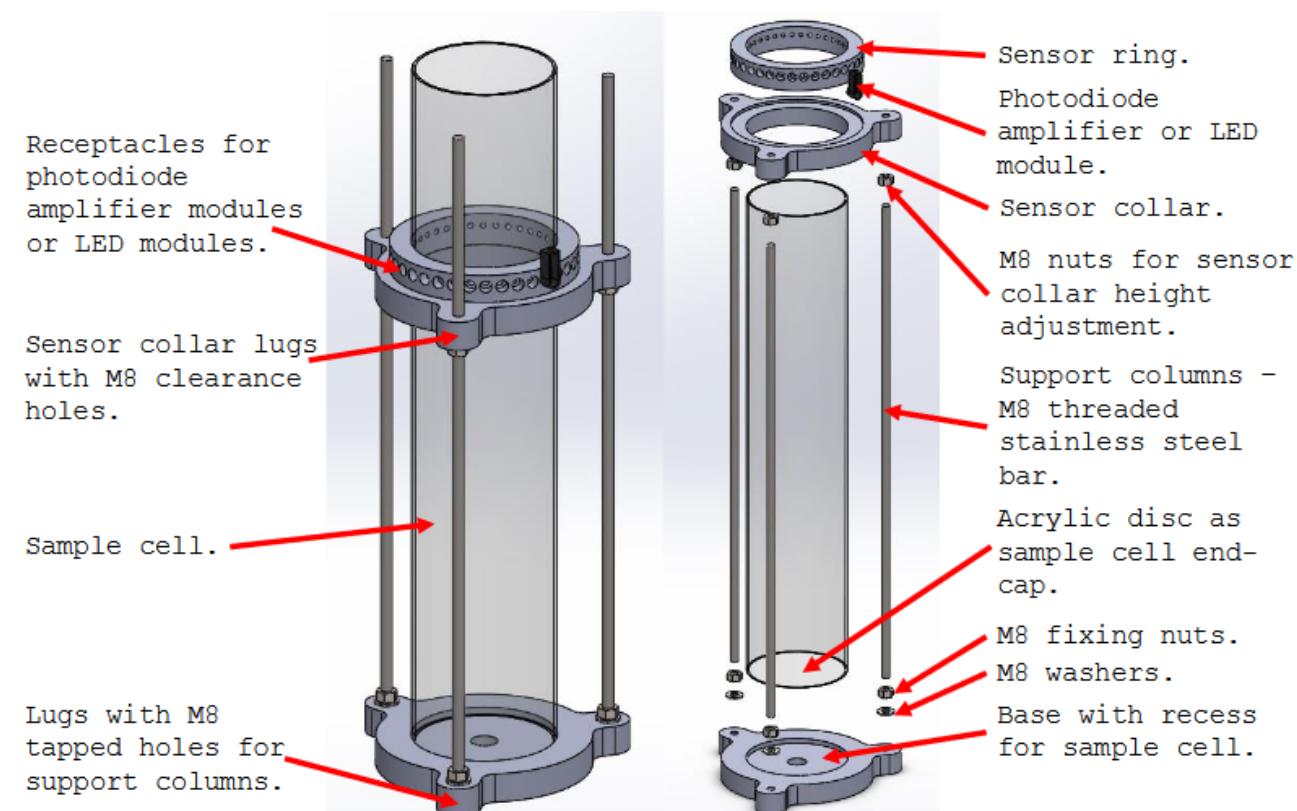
TARDIIS instrument assembly (left) and exploded view (right) showing the mounting system with support columns for the sensor collar containing the sensor ring.
